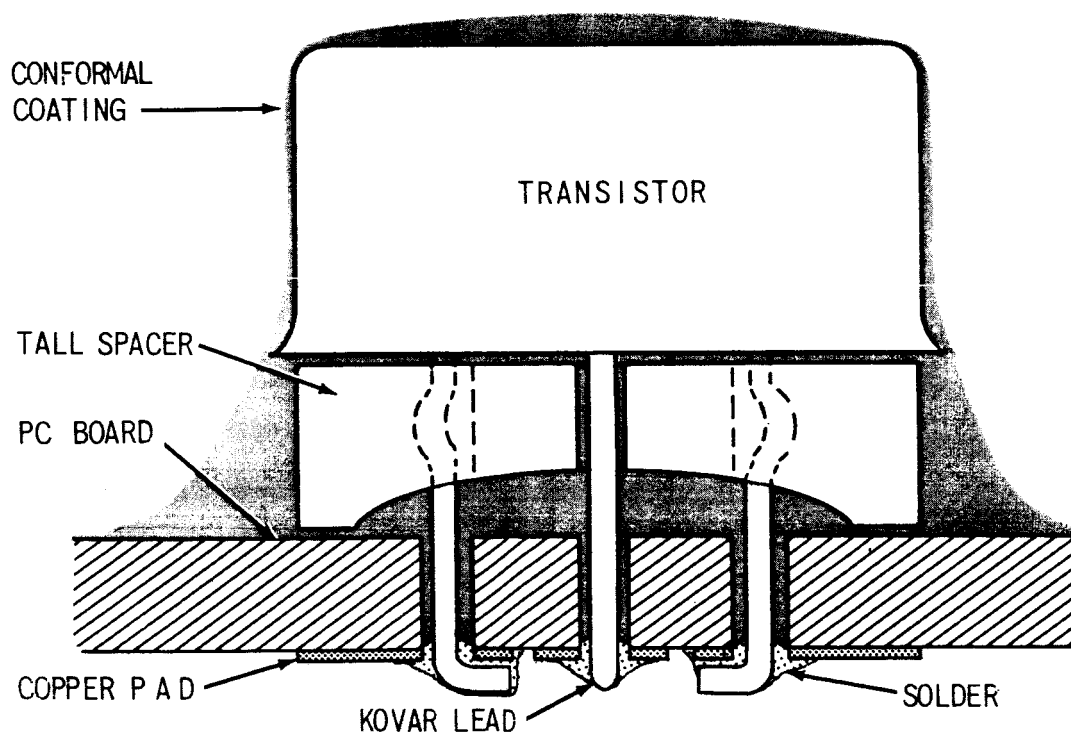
Transistor Mounting Using C-Bend Strain Relief
